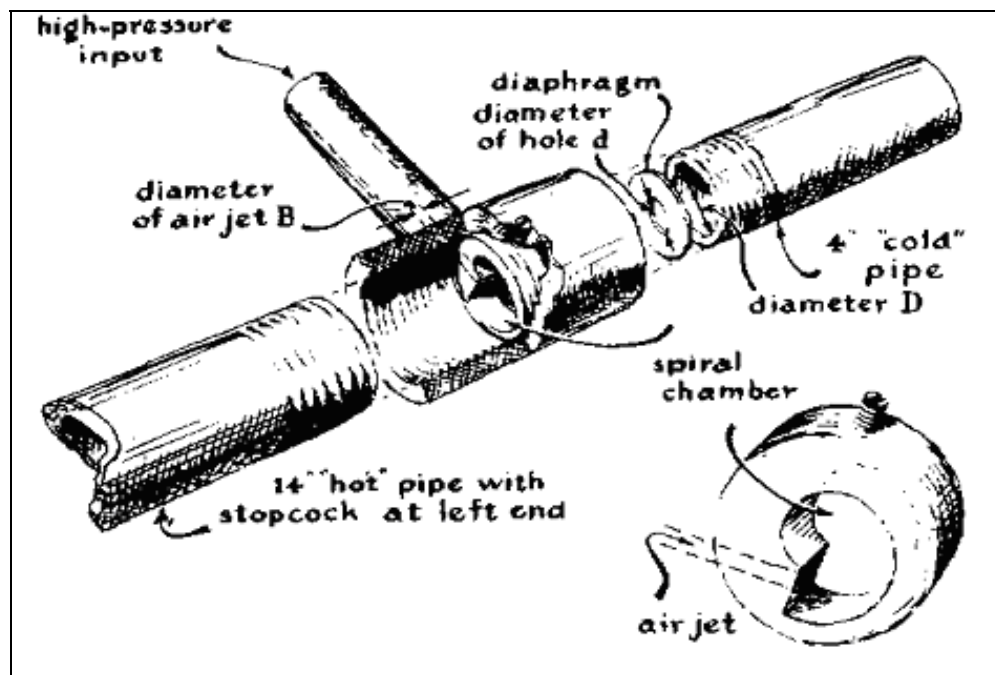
Cutaway view of Hilsch tube showing relation of spiral chamber to central pipe-coupling. Detail of spiral is at lower right [2]
